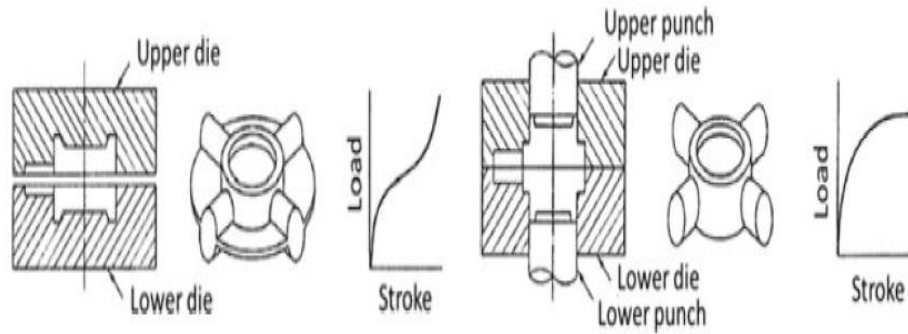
Enclosed-die forging. 1, billet; 2, upper die; 3, lower die; 4, upper punch; 5, lower punch; 1', finished part [31]
